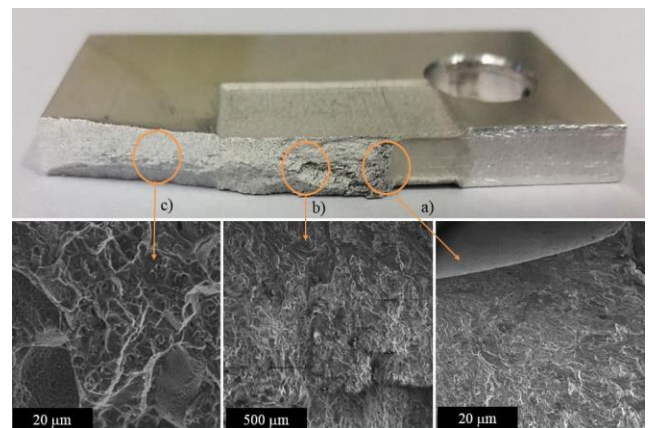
Fracture surface of a tested specimen with LSP, (a) Crack initiation zone, (b) stable crack growth zone, (c) Final rupture surface
